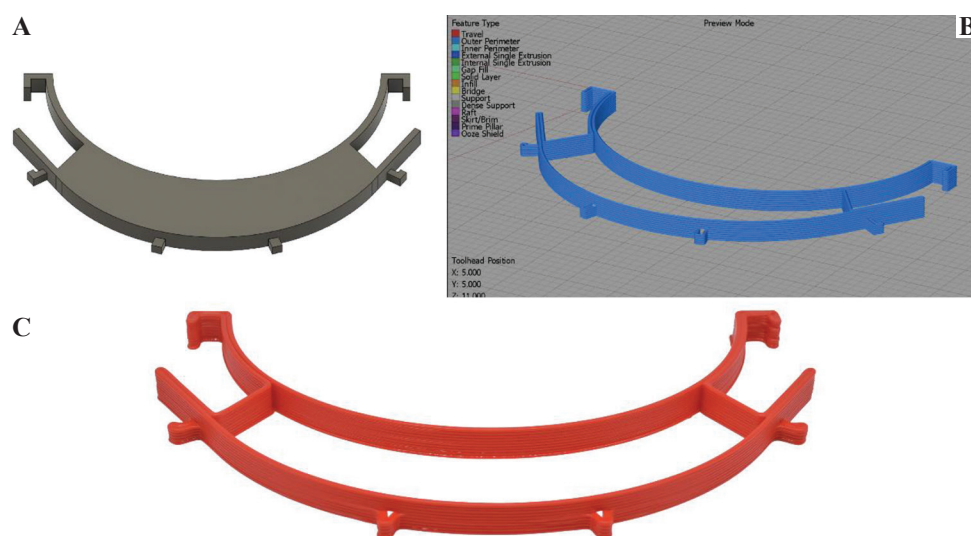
Improved face shield design using large-scale additive manufacturing, (A) showing the computer-aided design model, (B) the Simplify3D sliced print preview, and (C) the final printed part.
